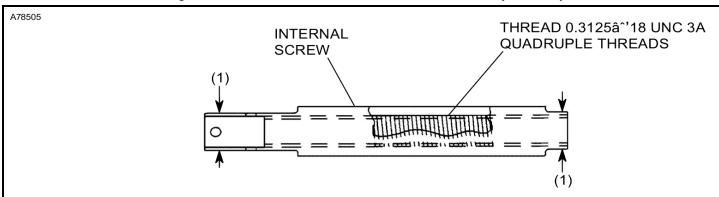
Sheet 7: Aileron Trim Tab Actuator Disassembly/Assembly
